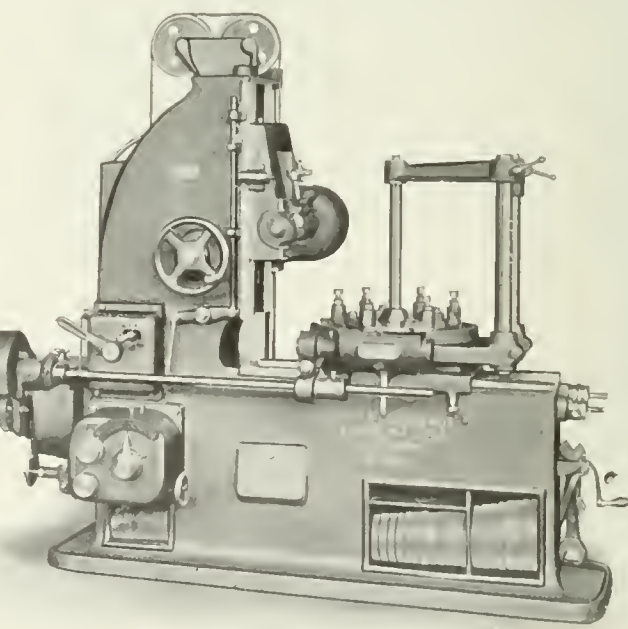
Gould & Eberhardt "Vertical Cutting" Automatic Gear Cutting Machine
